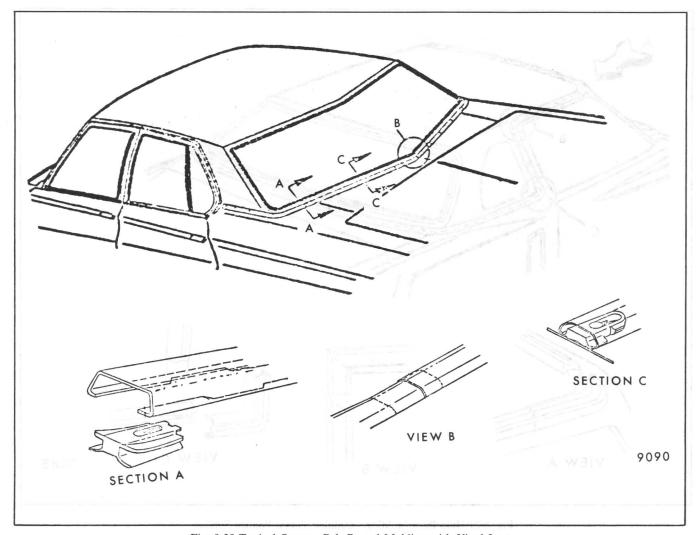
Typical Quarter Belt Reveal Molding with Vinyl Lace
